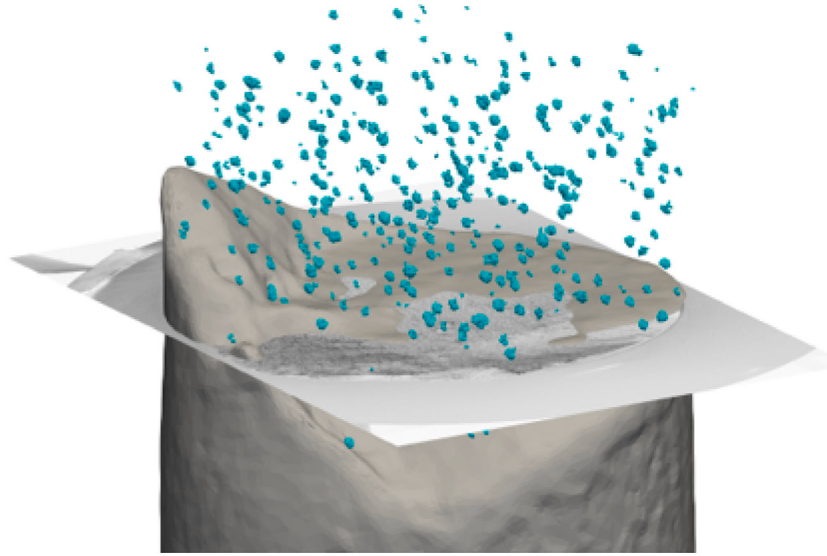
Example of alignment between a fractured sample half, the fractography and the defects detected by VGEasyPore®.
